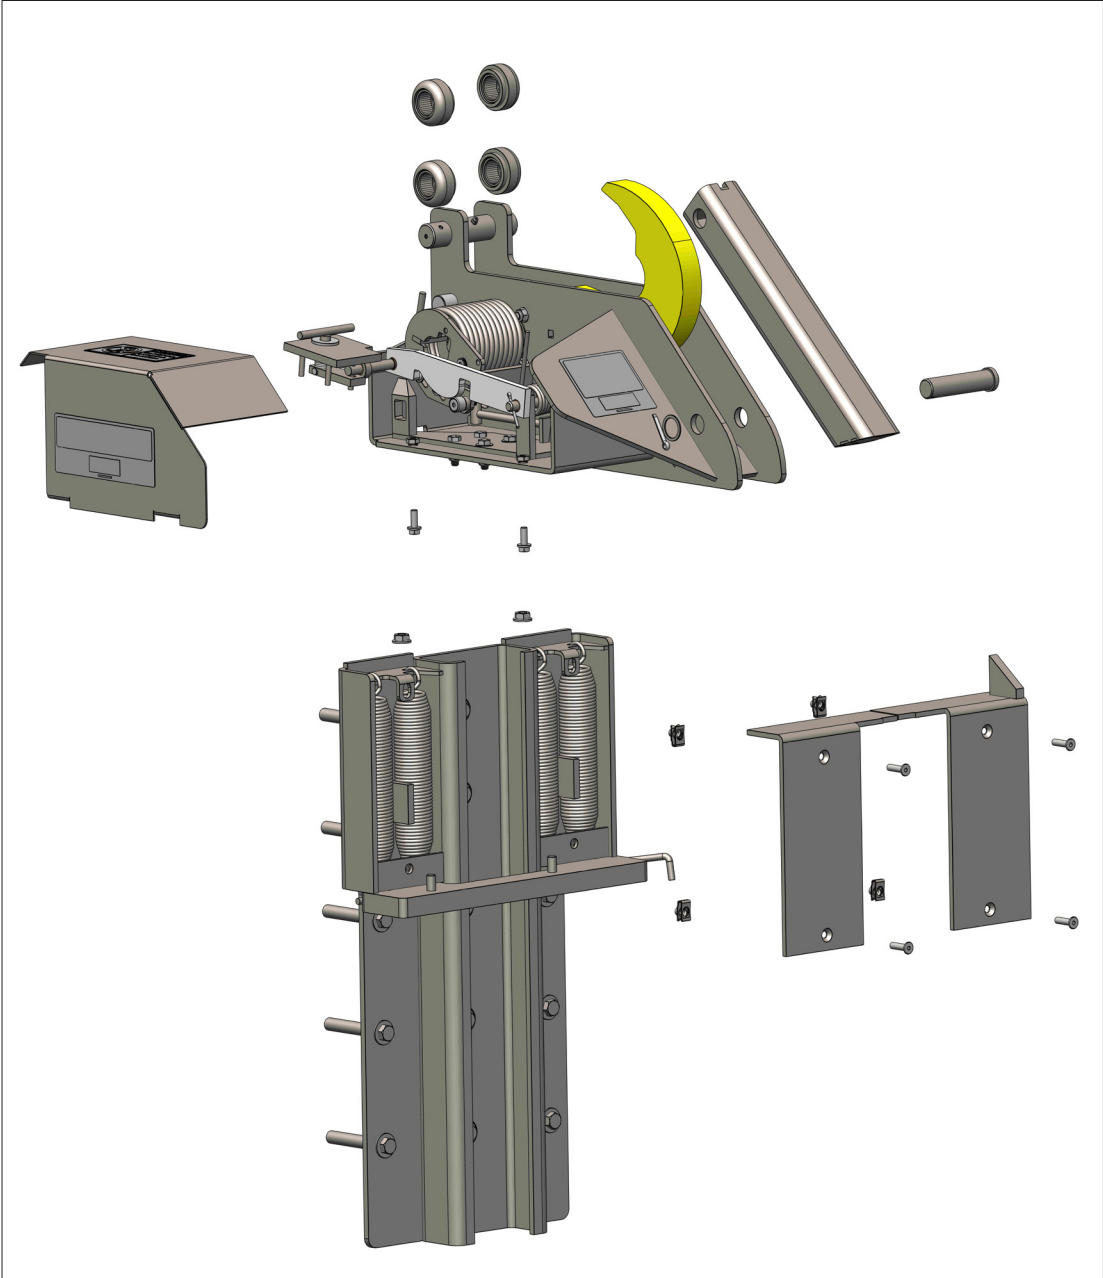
FIGURE F—INSTALL CARRIAGE ASSEMBLY INTO ROLLER TRACK
